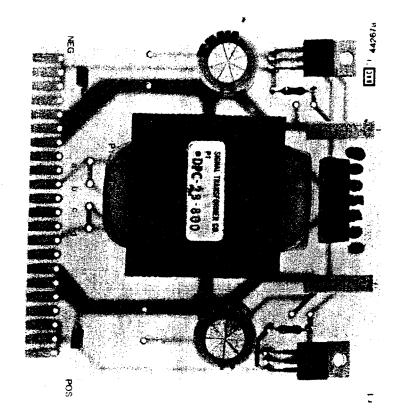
Regulated Power Supply Circuit Card Assembly
